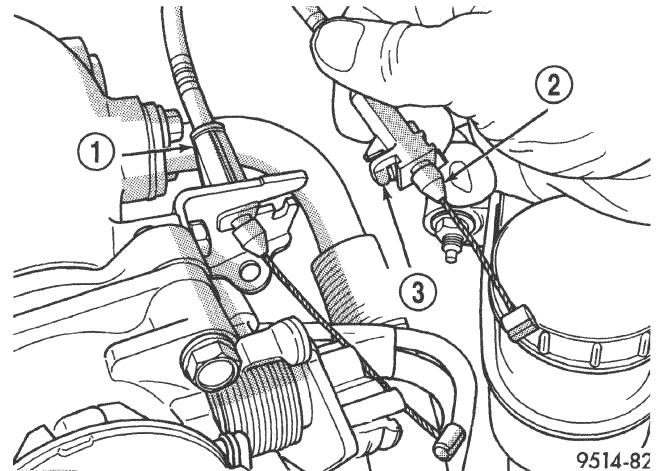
Throttle Cable Attachment to Throttle Body
